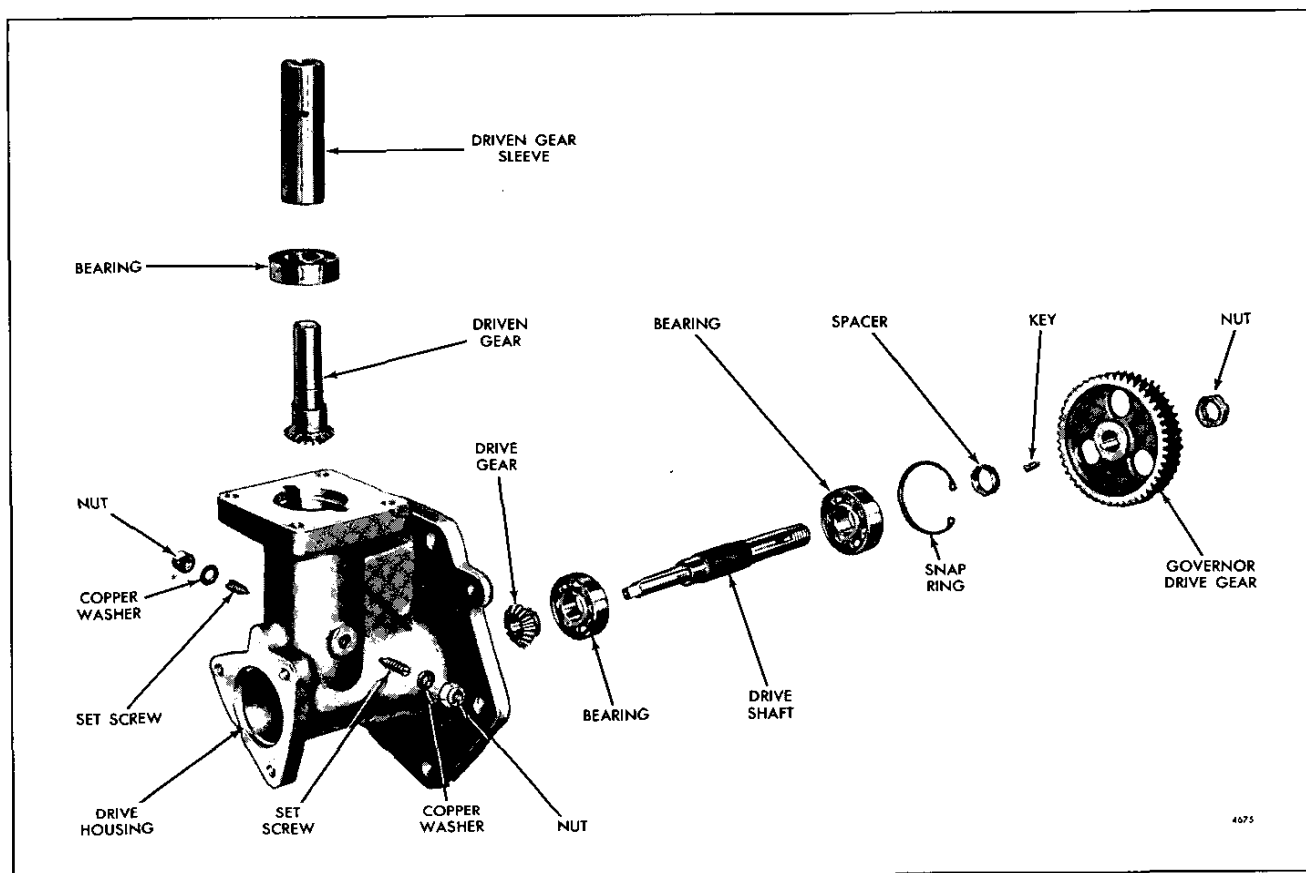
Hydraulic Governor Drive Details and Relative Location of Parts
